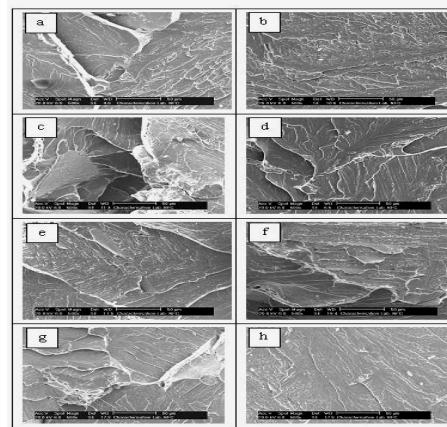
Fractographs of tensile (a, b, c, d) and impact specimens (e, f, g, h) of ferritic stainless steel weldments in as-welded condition
